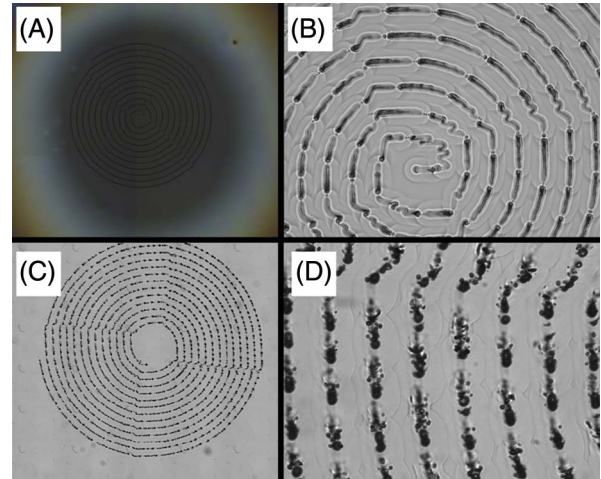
Microscope images for borosilicate to borosilicate welding: (A) overview (reflection 5 \times), (B) detail (transmission 20 \times) and fused silica to fused silica welding, (C) overview (reflection 5 \times), and (D) detail (transmission 20 \times).
